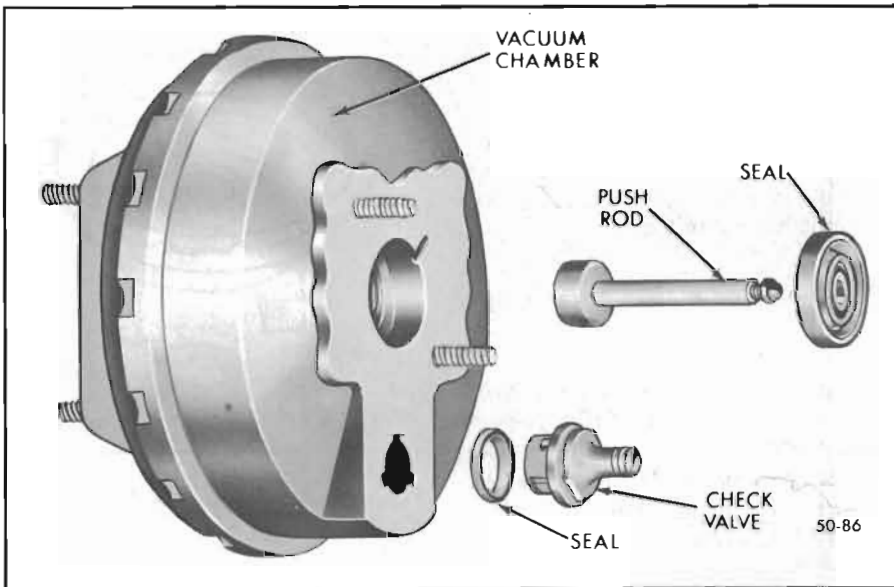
Removal of Seal, Push Rod and Check Valve
